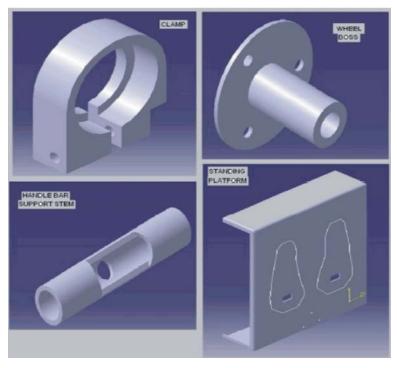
CATIA diagrams for Clamp, Wheel Boss, Handle Bar Support Stem and Standing Platform
